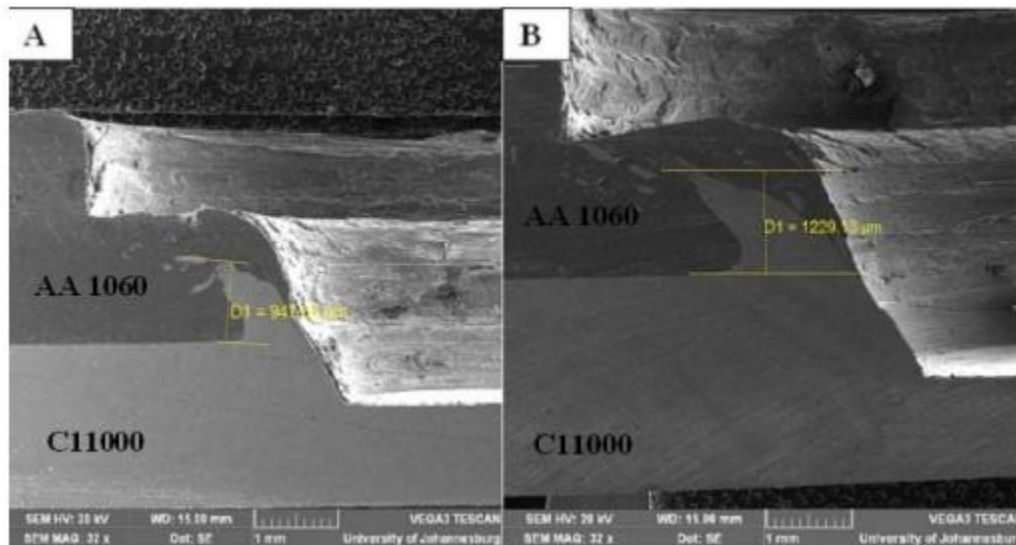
Copper ring size of weld produced using conical pin (3mm length) and a concave shoulder (15mm diameter) at welding conditions of 800 rpm and 0.5mm (A) and 1.0 mm (B) shoulder plunge depth.
